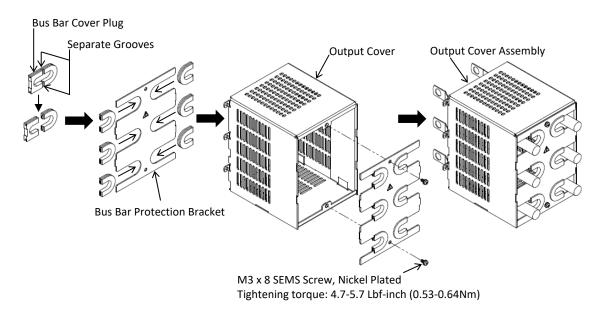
Three 60V-100V Units, Wire Diameter > 11mm, Output Cover Assembly
